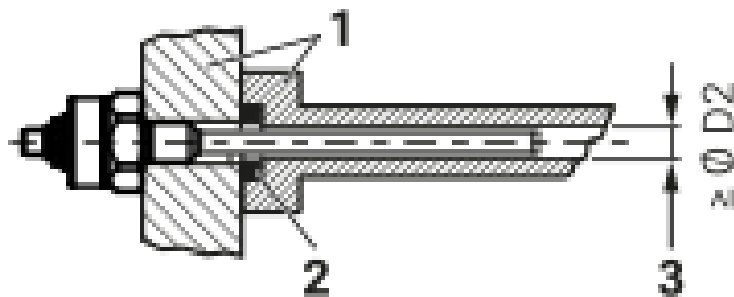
min. Ø D2 = Minimum bore diameter (see [Table Bore Diameter](#))
